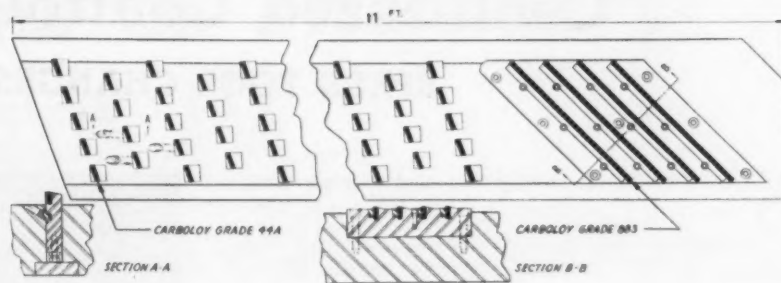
This sketch shows the construction of the broach bodies. Section A-A shows how single point roughing and semifinishing tools are adjusted for height and locked in place. Section B-B shows method of holding the solid Carboly finishing blades.
